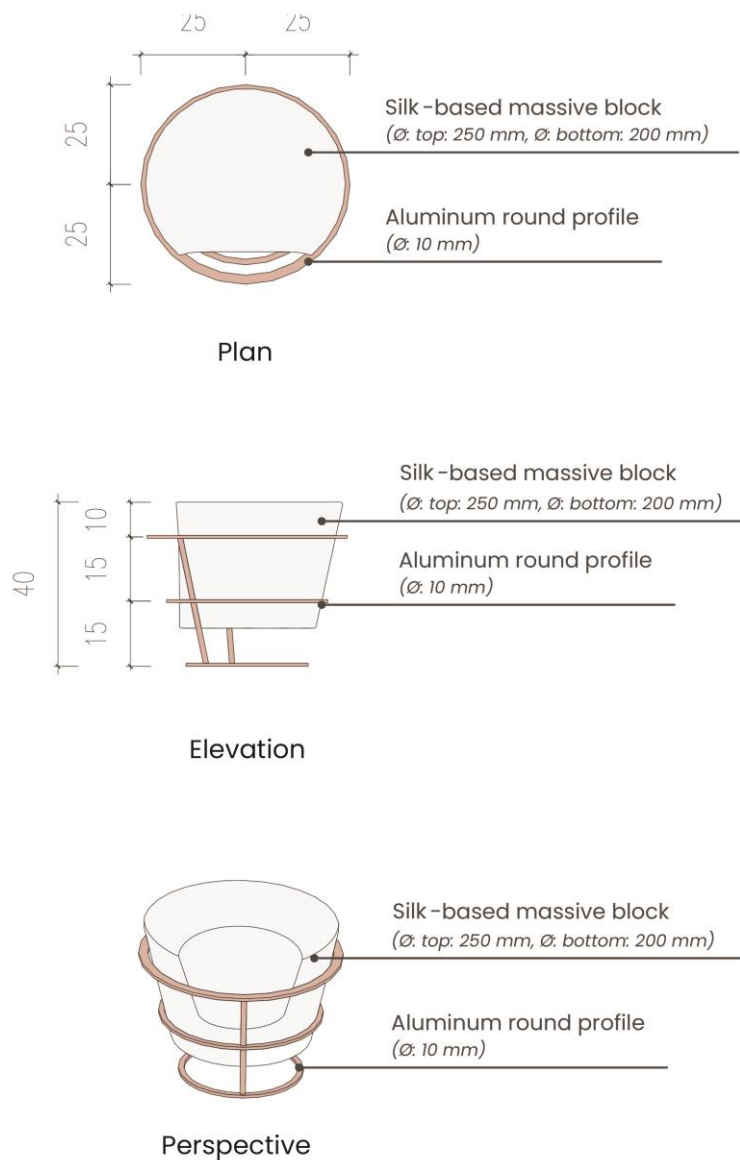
Plan, elevation and perspective views of the stool furniture made of textile-waste massive blocks and supported with an aluminum frame (Drawn by the author) Scale 1:20
